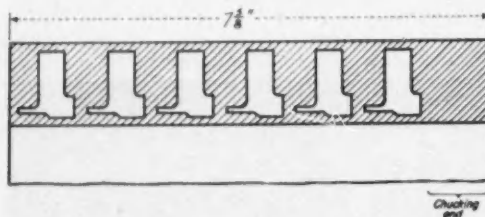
Rings used in jet engines show economy of cutting multiple units from one blank (from "Centrifugal Casting in Permanent Molds" by Warden F. Wilson in *Product Engineering*, Vol. 21, No. 11, Nov., 1951, pp. 112-116)
